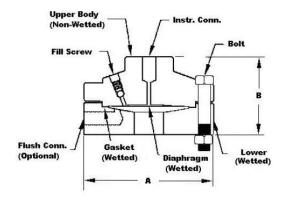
Seal Dimensions (Threaded Process Connection Seals)
